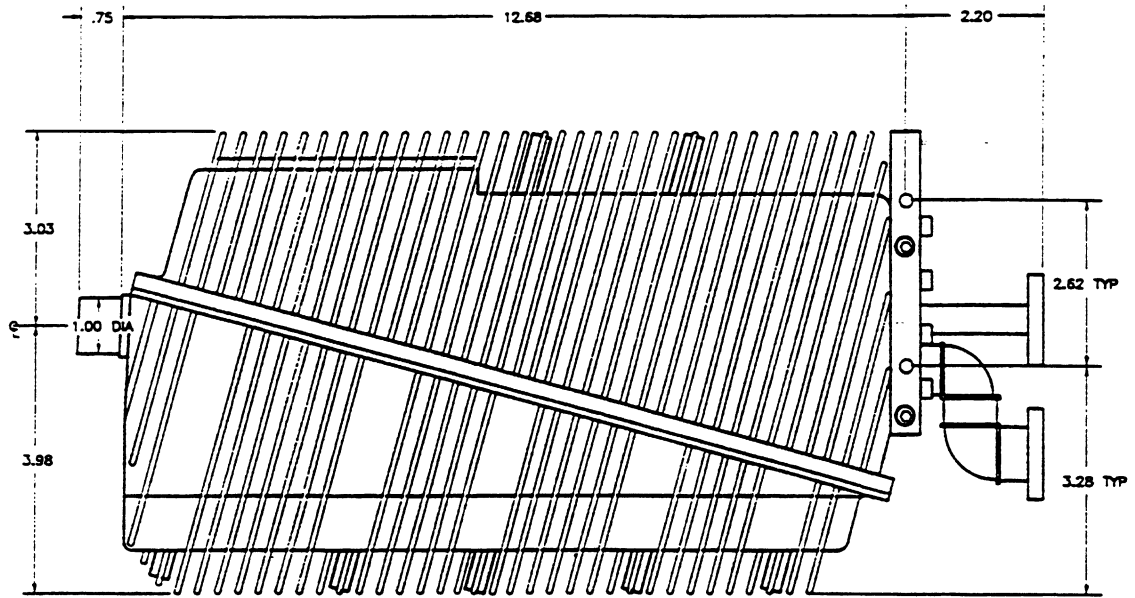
Mounting Dimensions, "-75" Series RF Feed Assembly
